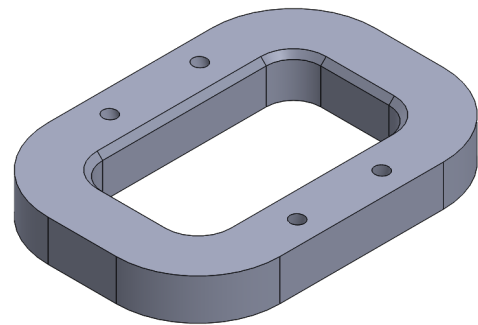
InnerCam's fixed body (Solidworks™ view)
